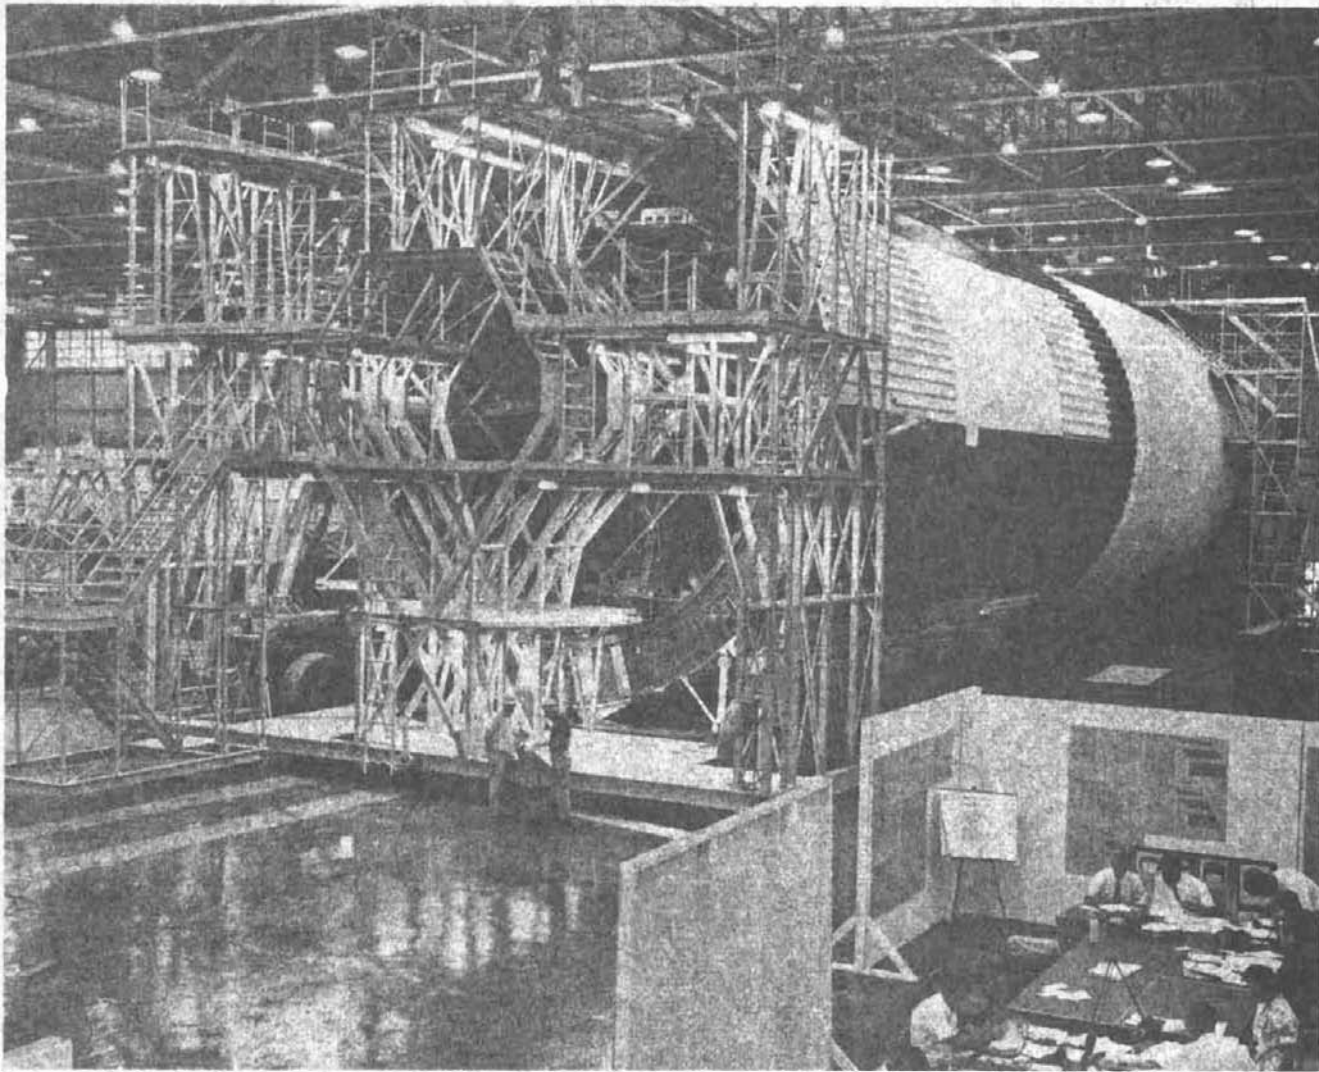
S-1C-D IN THE HORIZONTAL INSTALLATION FACILITY
